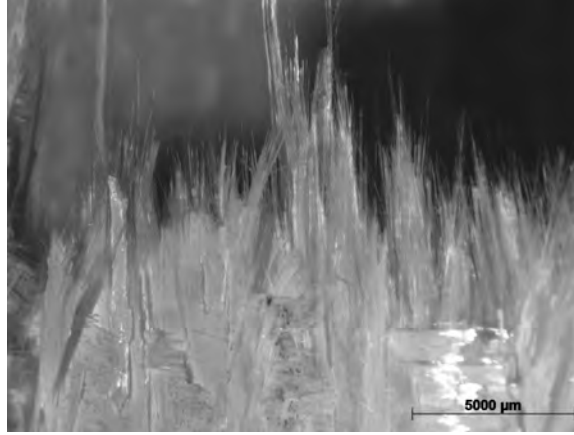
Closeup of Nextel™ 720/AS oxide-oxide involute tube specimen 12-063 fracture damage from pure torsion
